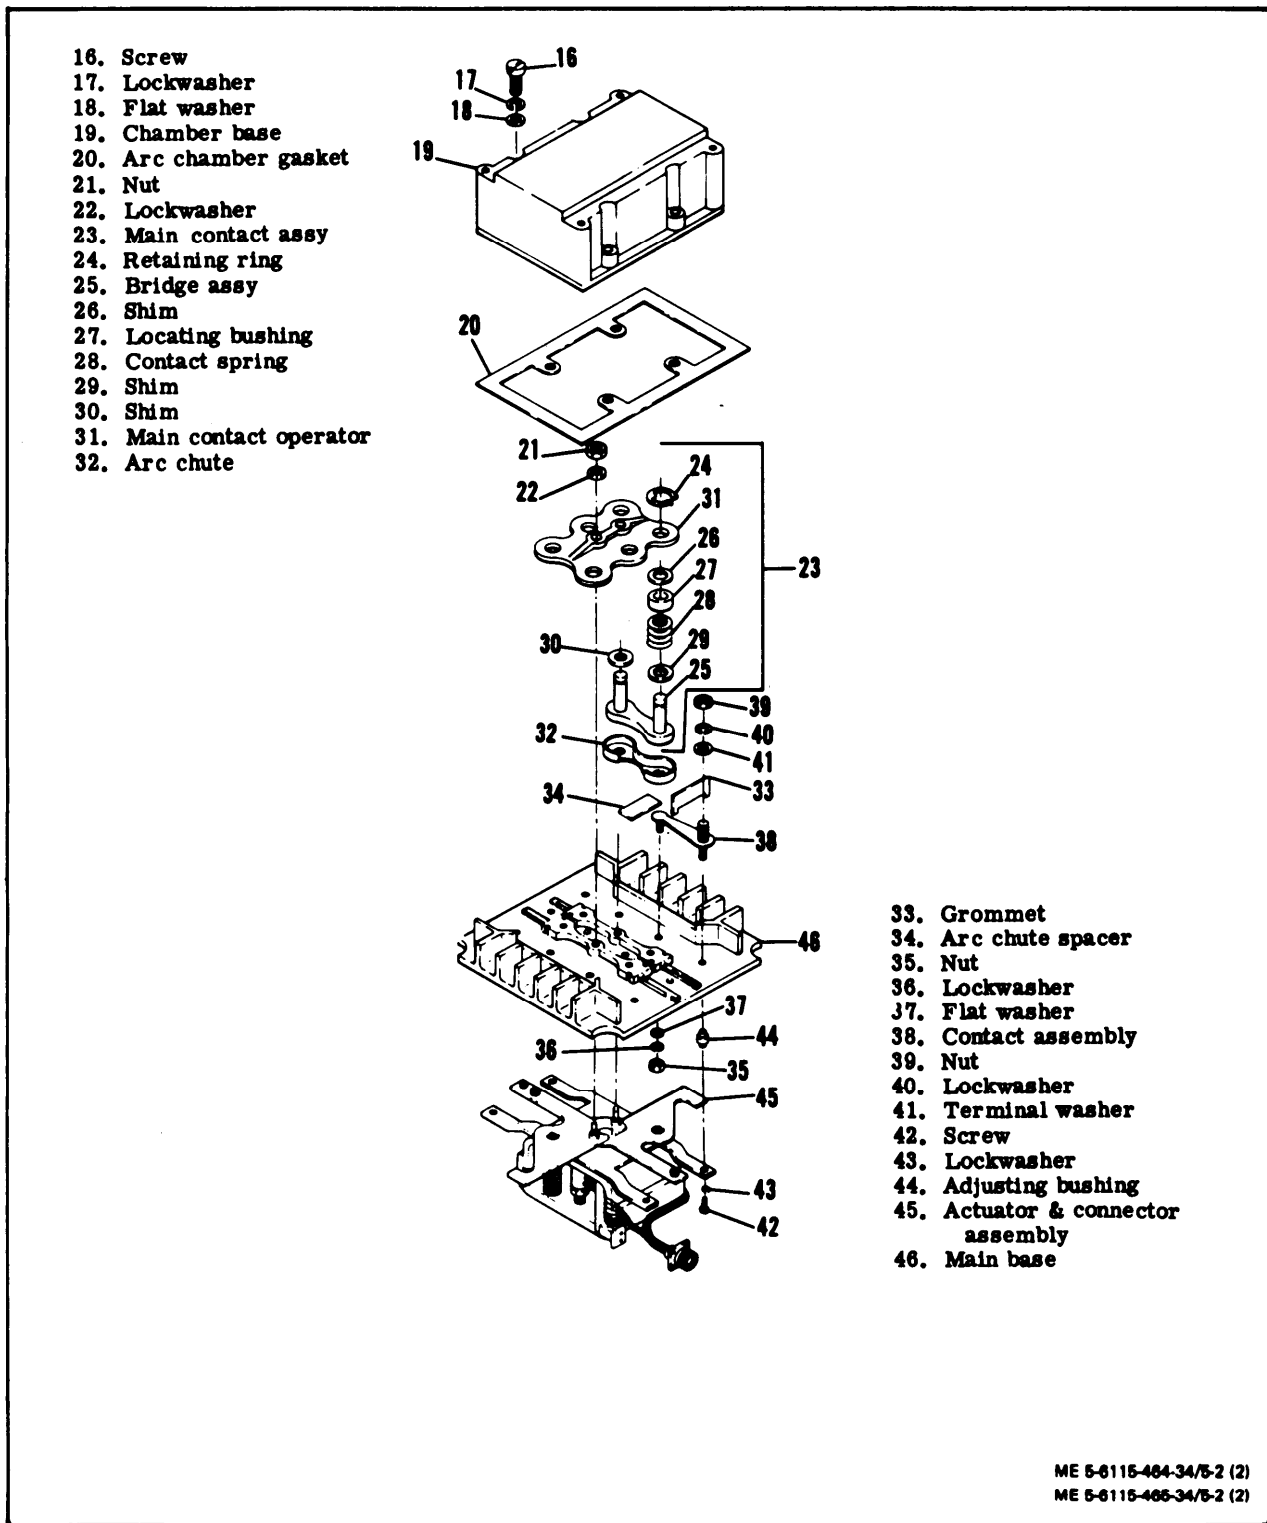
Main Load Contactor, Exploded View (Sheet 2 of 3)
